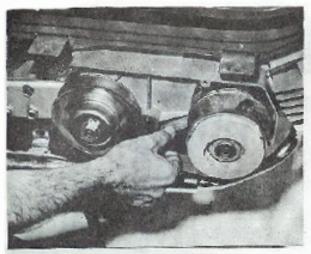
Remove righthand crankcase cover. Take off V-belt and fold into a figure '8'.
